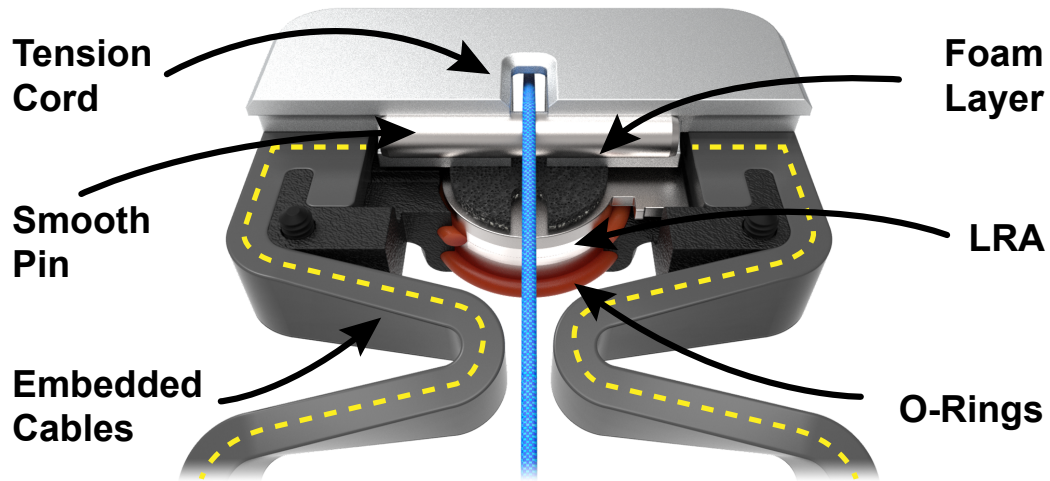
Tasbi Vibrotactor Assembly – The tactor is secured into the lower plastic housing via two O-rings and a foam layer. The metal lid contains a press fit smoothpin over which the tension cord slides. Tactor power cables are embedded within the 3D printed band sides in a post-processing step.
